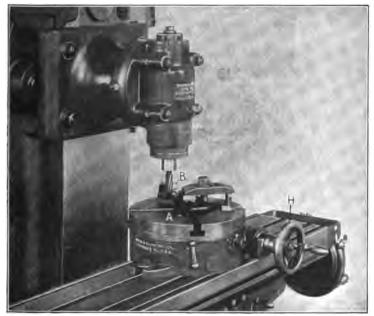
Combined use of Vertical and Circular Milling Attachments
